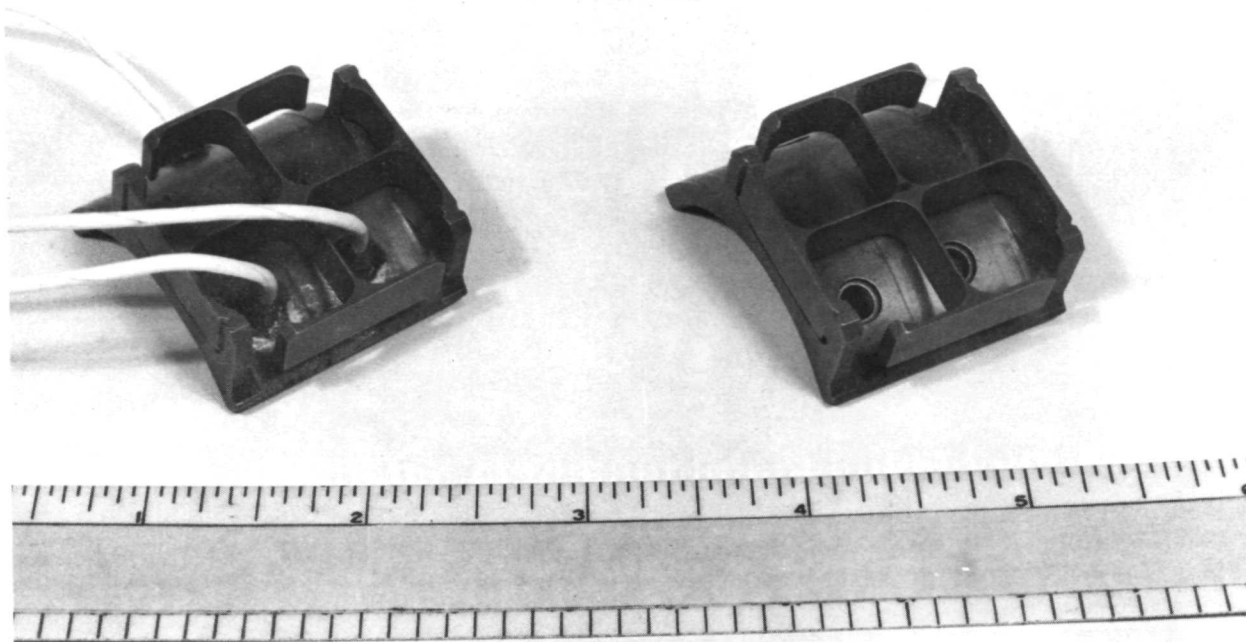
Modified, Cruciform-Supported, Tilting-Pad Bearing
